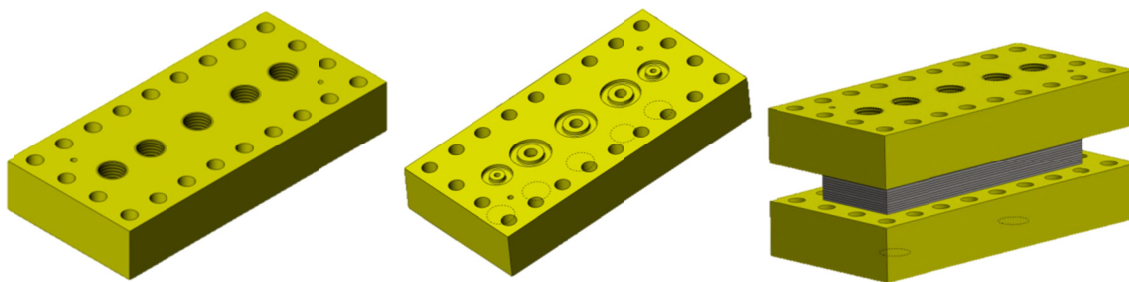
Top view of the top PEEK cap (left), bottom view of the top PEEK cap (middle), and assembly view of the test section (right)
